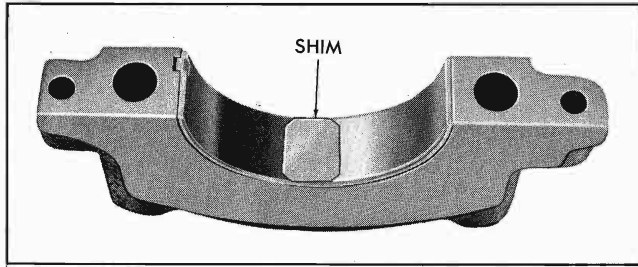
002 Shim Positioned in Cap for Checking Bearing Clearance
